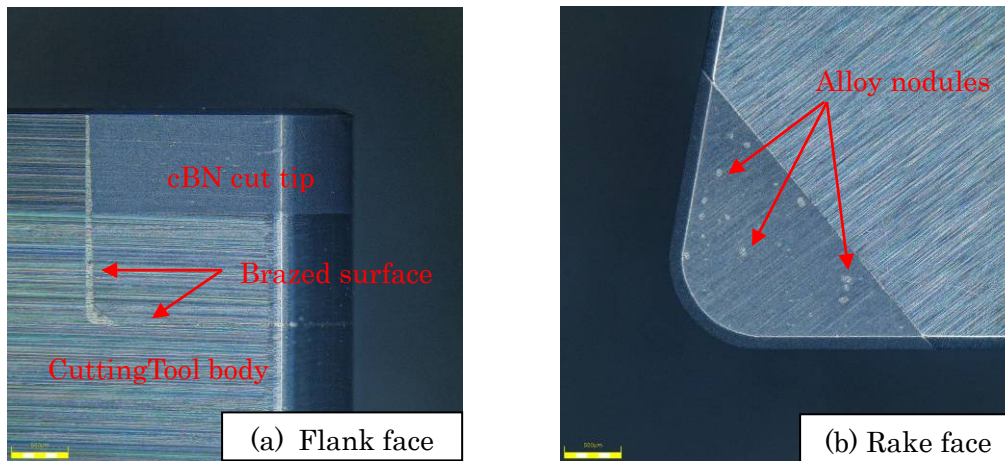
Flank face and the rake face of the PCBN cutting tip.
